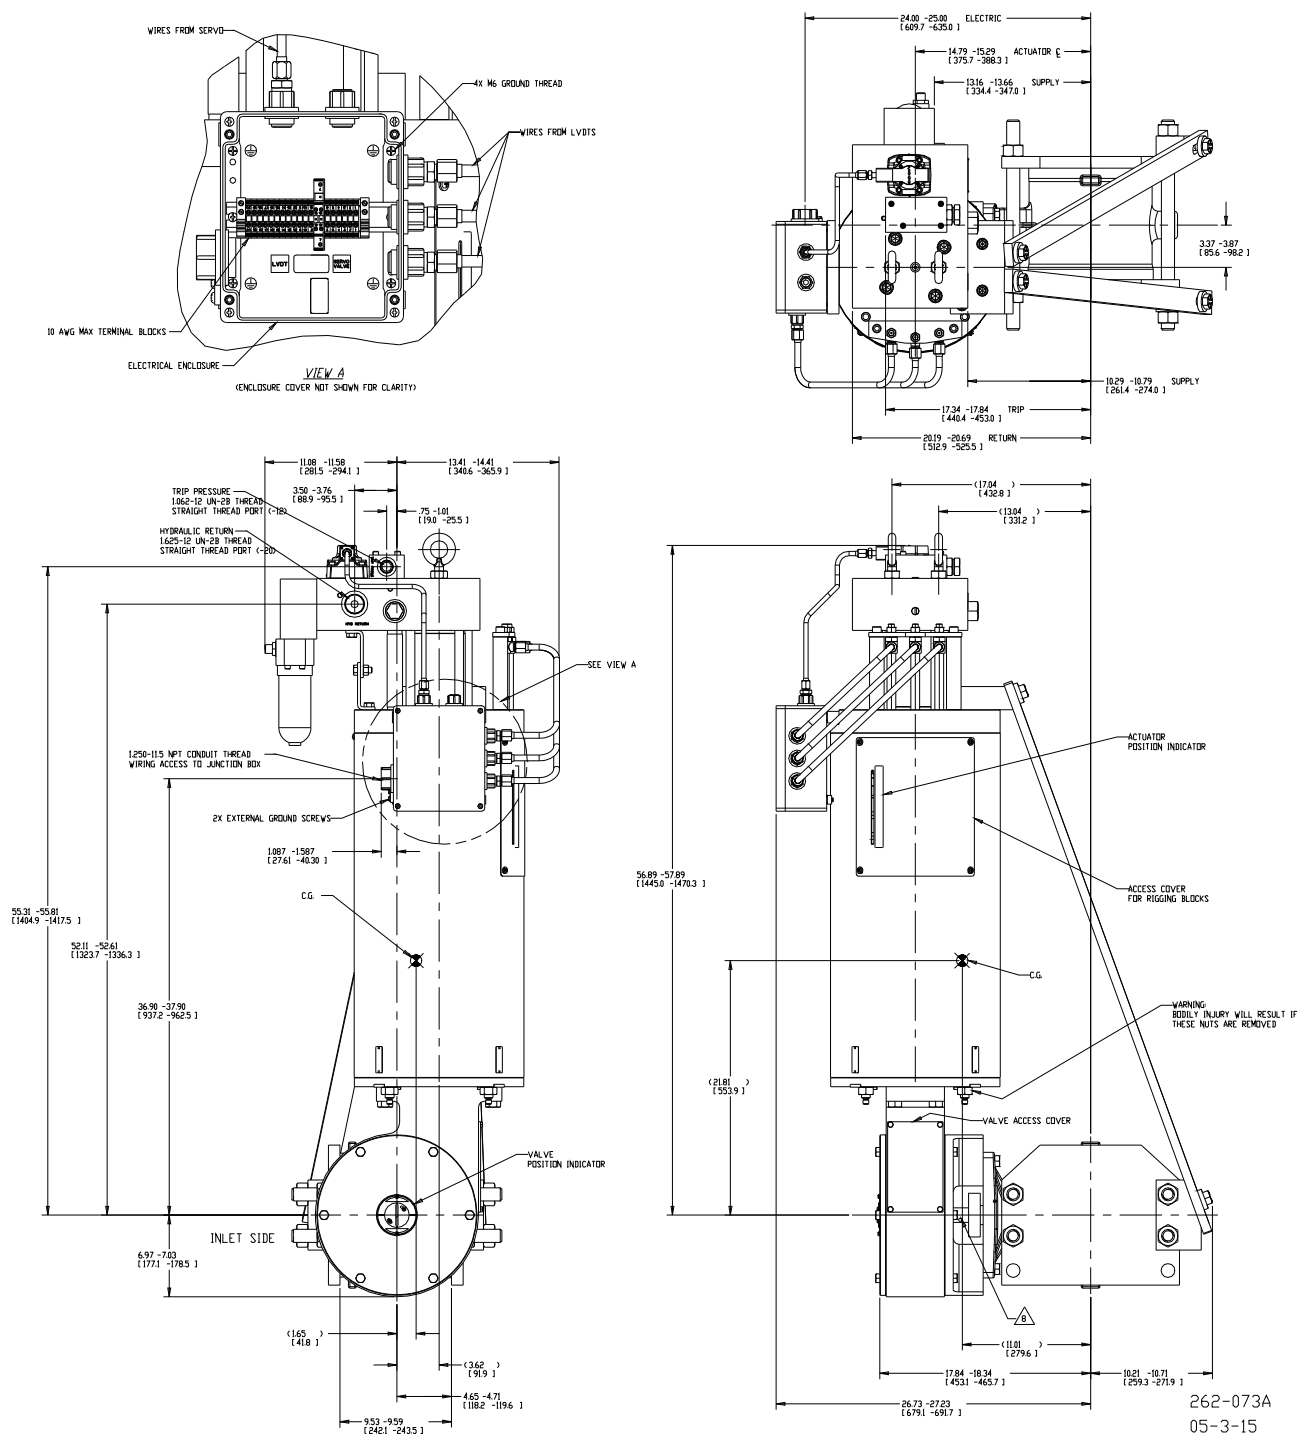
8-inch SS-260 Gas Stop/Ratio Valve Outline Drawing
